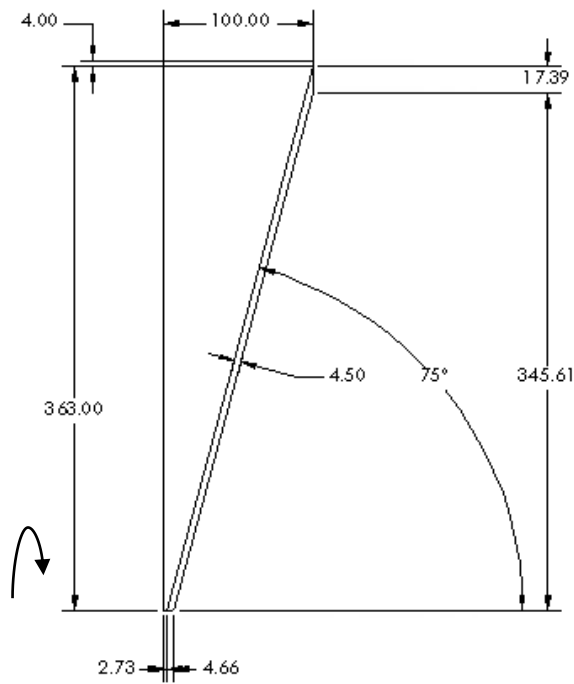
2D Drawing of 45.60 kg TNT Shaped Charge (Dimensions are in mm).
